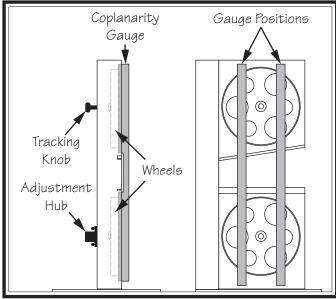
Illustration of using coplanarity gauge to check wheel alignment.
